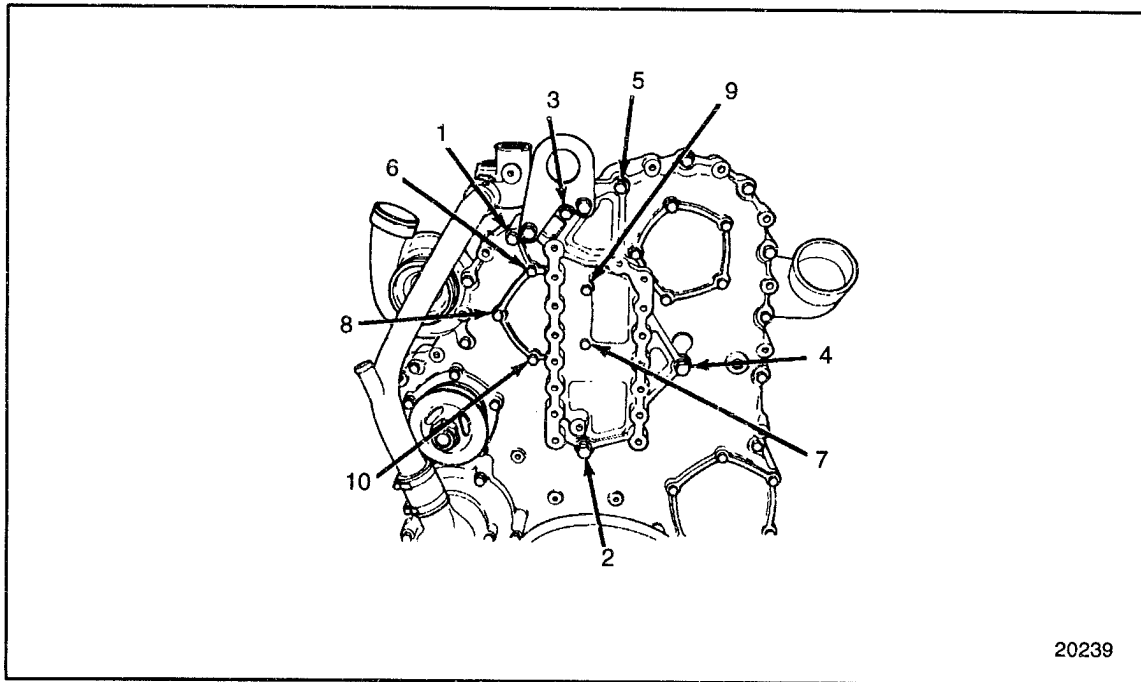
Camshaft Drive Gear Access Cover Bolt Torque Sequence
